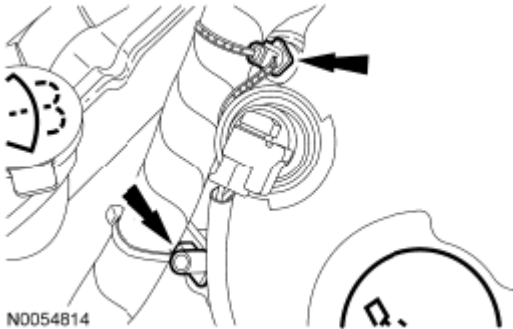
Locating LH Valve Cover Stud Bolts & Wiring Harness
